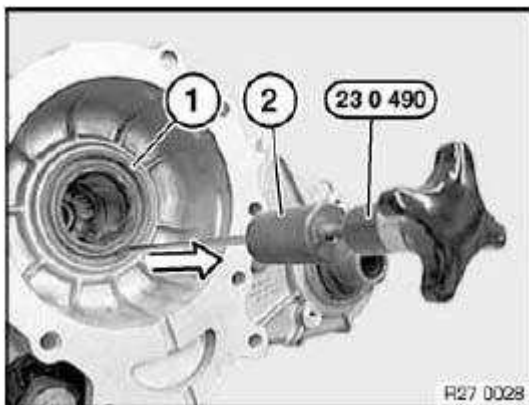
Driving Out Radial Shaft Seal With Impact Weight
